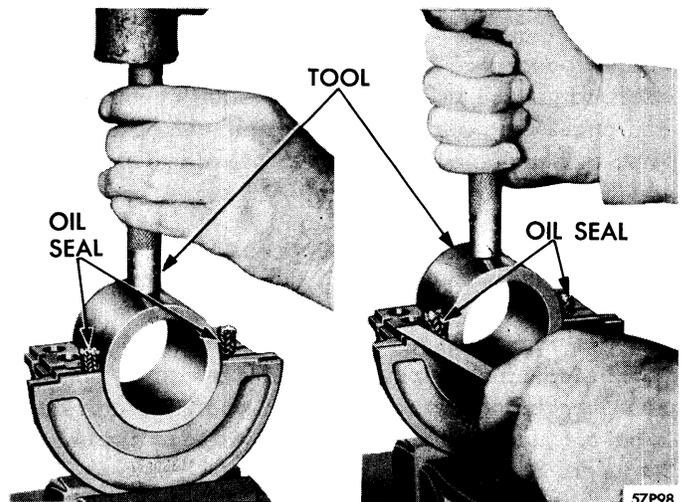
Installing Rear Main Bearing Oil Seal—277,
